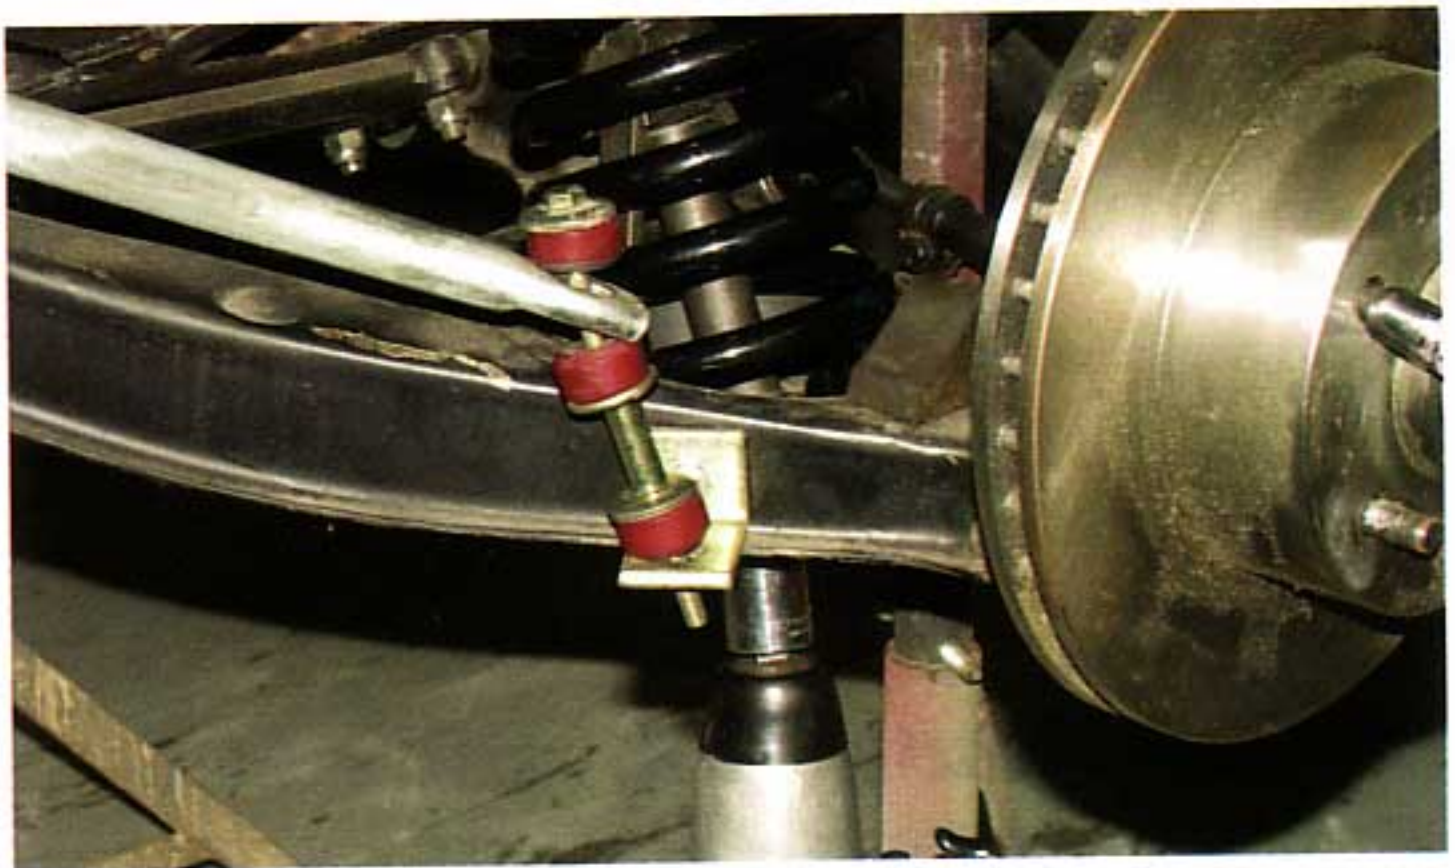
With the shock absorber removed and the sway bar end link loose, feed a coil spring compressor up through the lower control arm. Connect the spring compressor to the spring and tighten the compressor down to take the load off the control arms.
